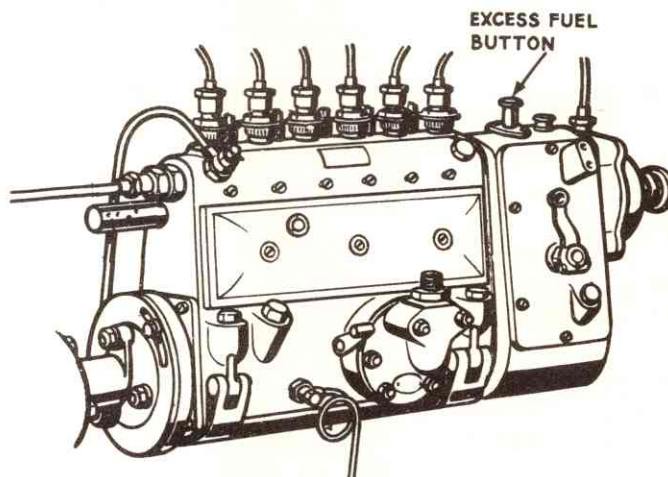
Excess Fuel Control -- Type 450, 600 and 680 Engines
